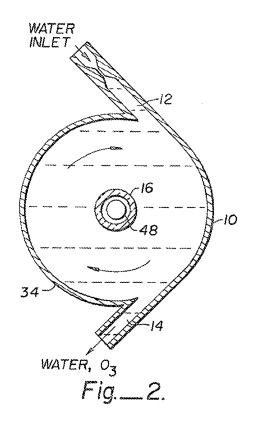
of DADD shows a water inlet 12, a water outlet 14 and a conduit 16. In the conduit 16 is the glass tube 48 of an ultraviolet light.
